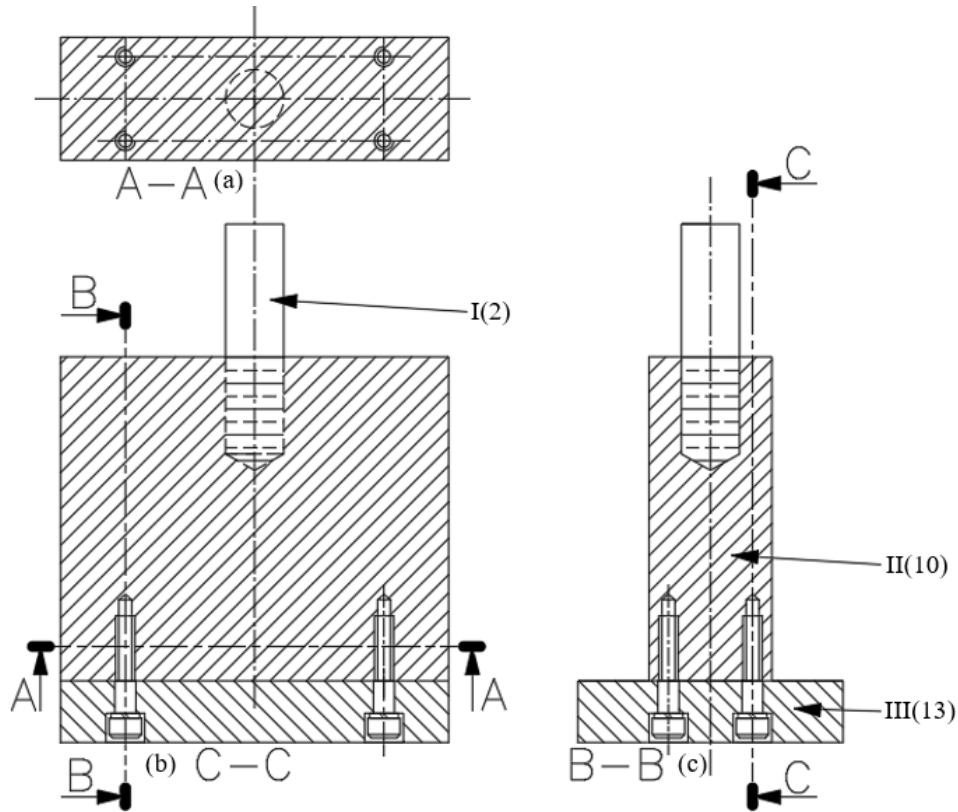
Technical assembly drawing (in section) of the mobile ferromagnetic circuit
